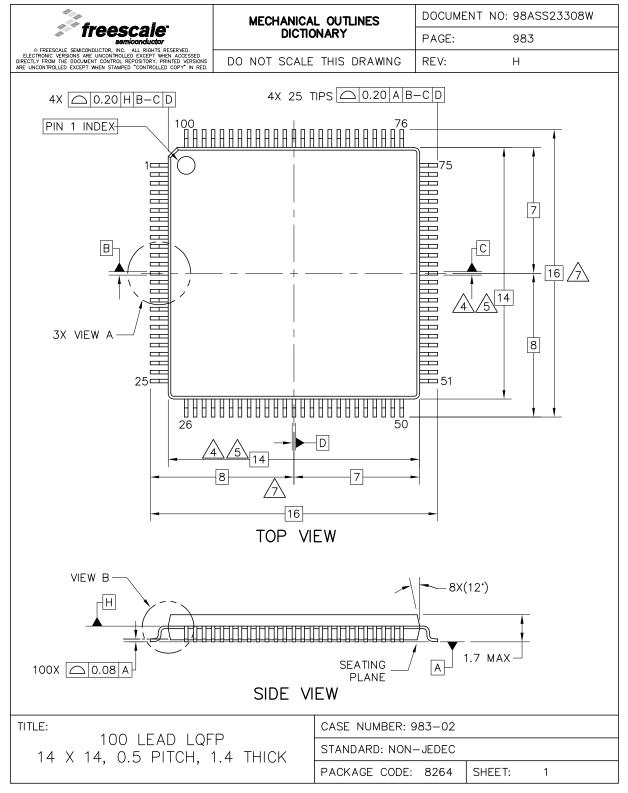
100 LQFP package mechanical drawing (Part 1 of 3)
